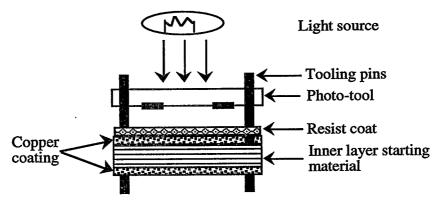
Schematic Drawing of an Exposure Tool for Inner Layers.
